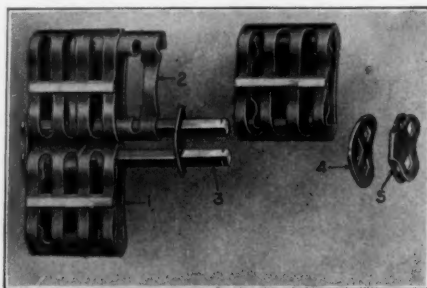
VARIOUS PARTS OF THE LINK SHOWING HOW THEY ARE ASSEMBLED
